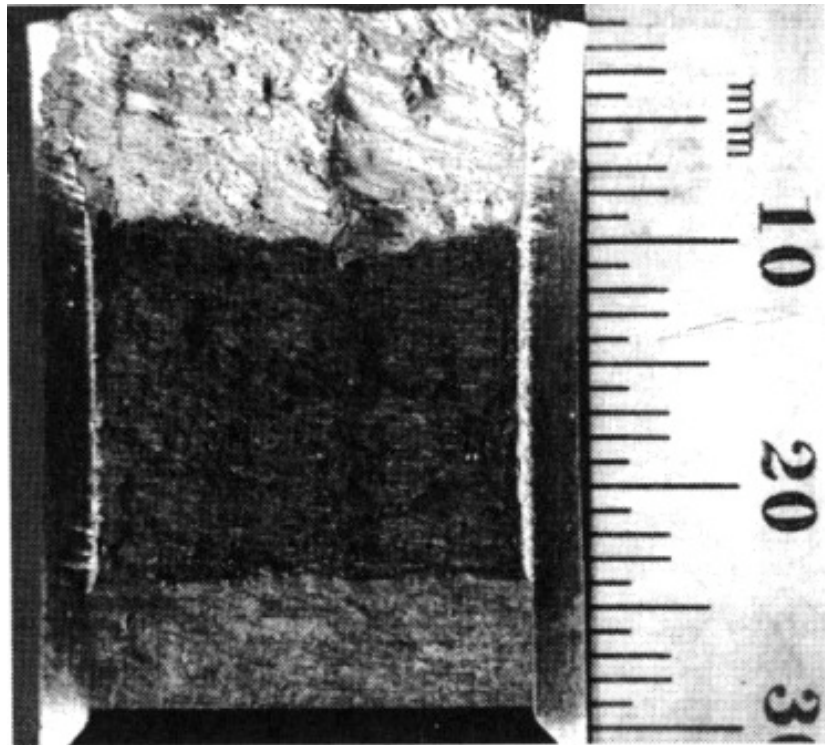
Fracture surface of aged weld metal PWWO tested at 290°C
